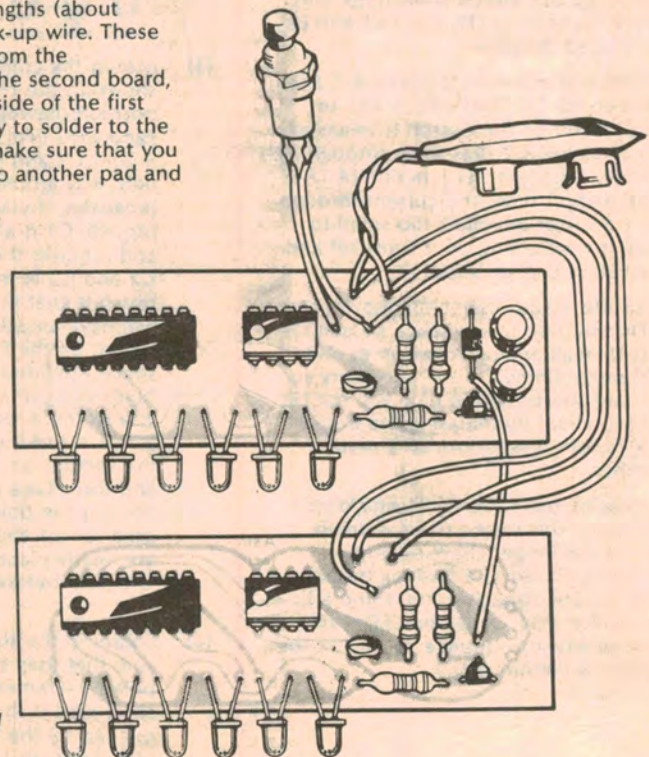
Wire the double LED Dice like this. As you can see, there are a number of components not needed on the second PCB.
